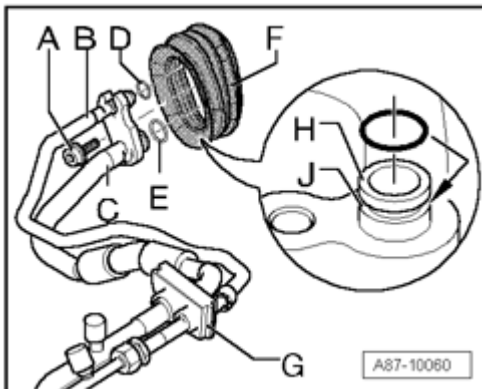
Screwing Out Bolt And Disconnecting Refrigerant Pipes
